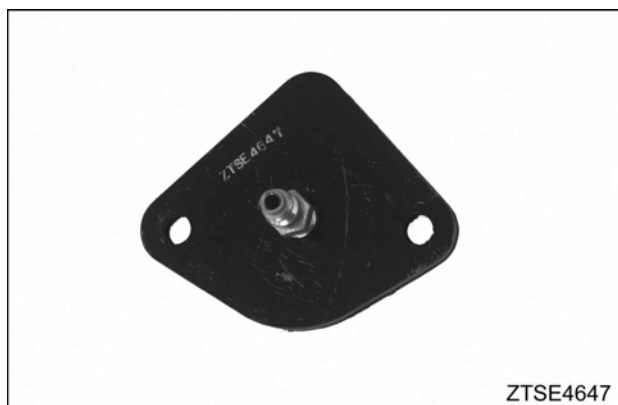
Thermostat opening pressure adapter– cylinder head, ZTSE4647
